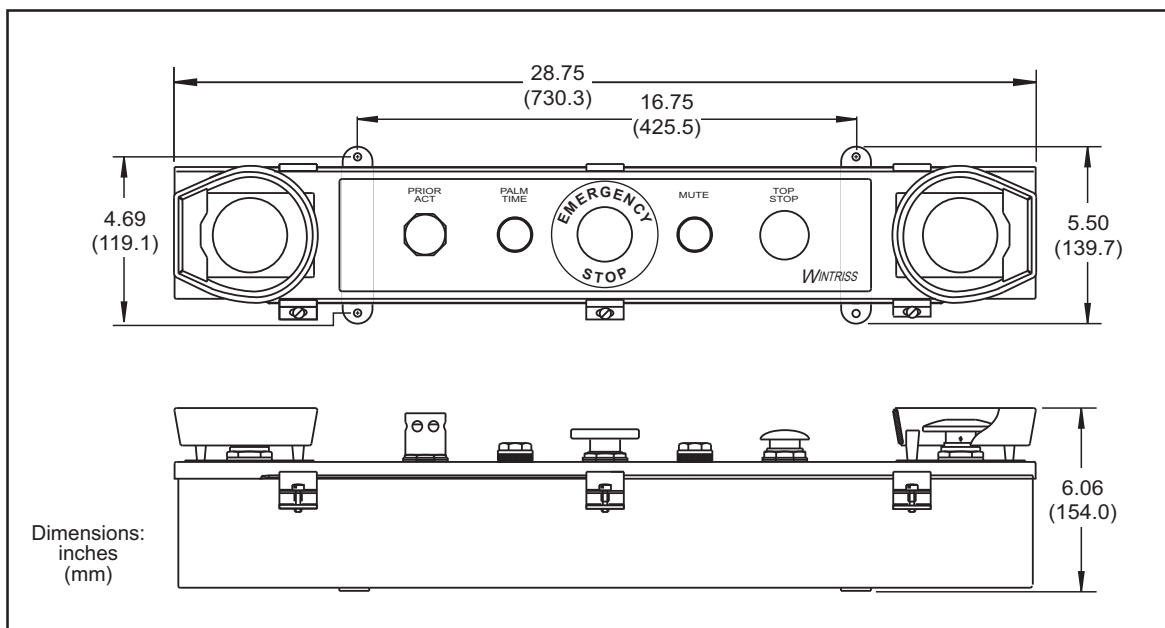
Pre-wired Operator Station with Top Run Buttons: Mounting Dimensions
